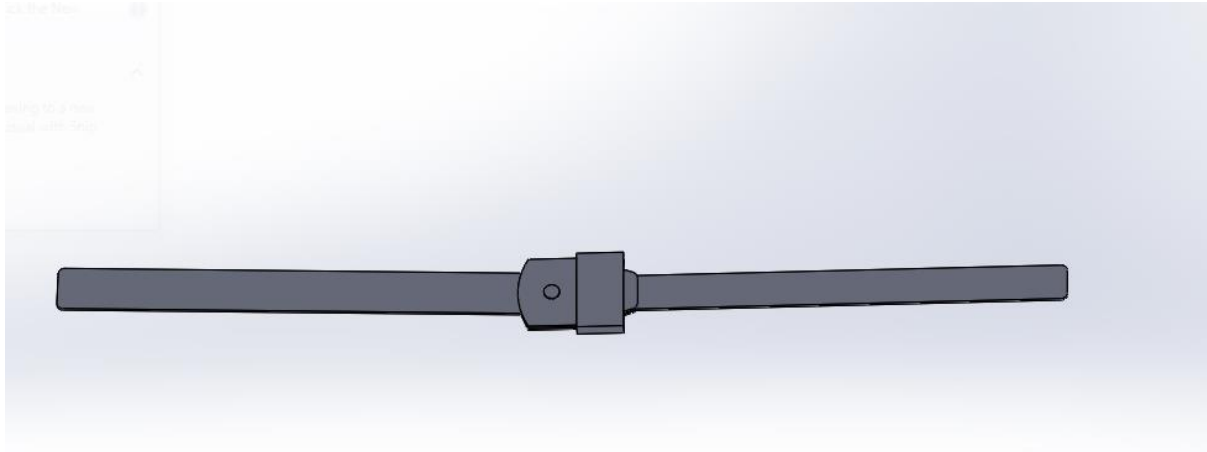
Model 1- Complete assembly including Side Braces, Joint and Lock
